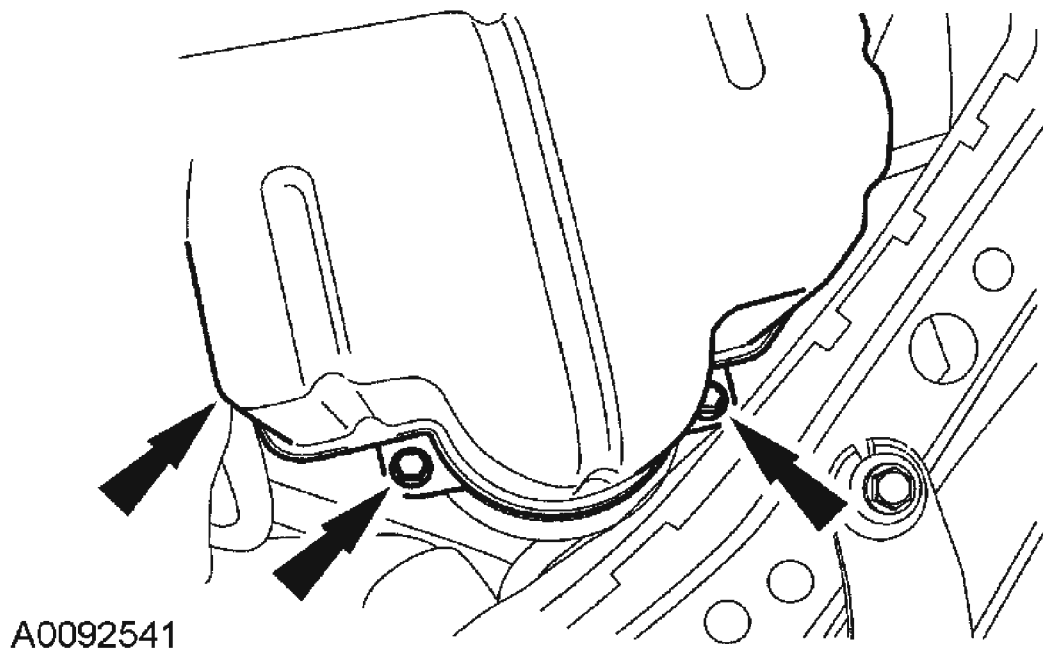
Removing Bolts And Detaching Air Intake Resonator From Grommets
